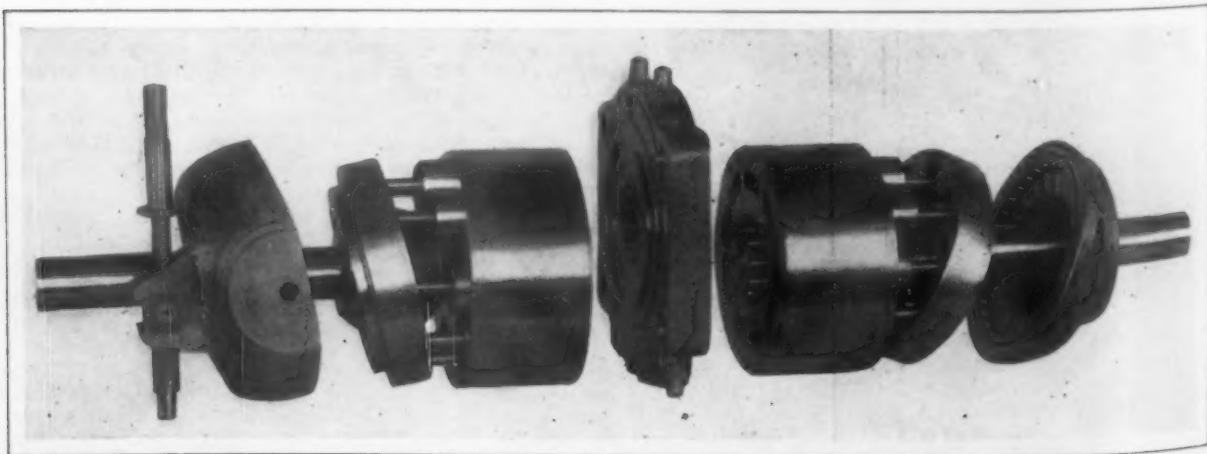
View of the Gear with the Outer Casing Removed and the Internal Parts Slightly Separated to Show Their Arrangement
